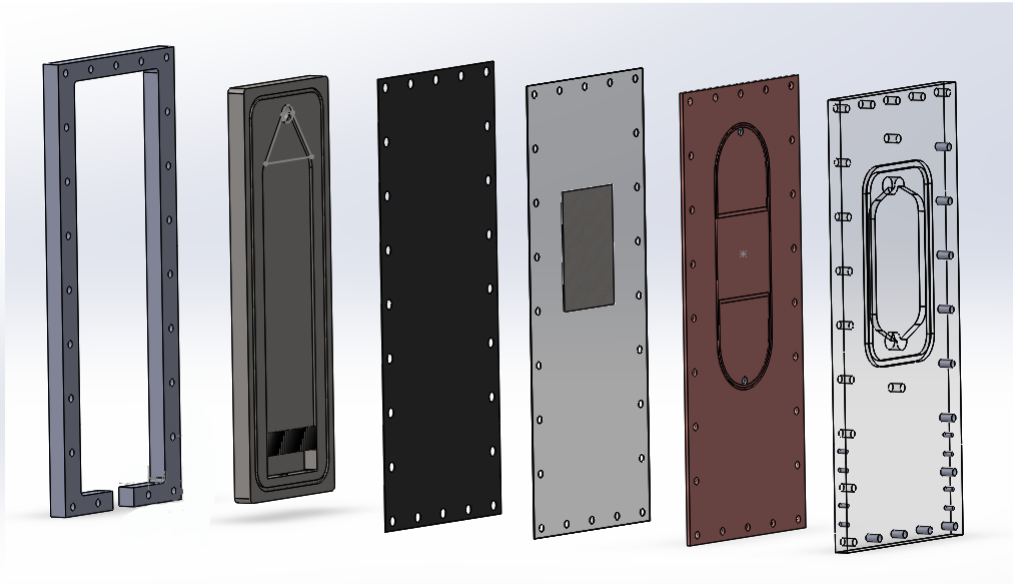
MD assembly showing individual components. Left to right: Metal flange, feed plate, MD membrane, plastic spacer with mesh spacer, condensing plate and cooling channel
